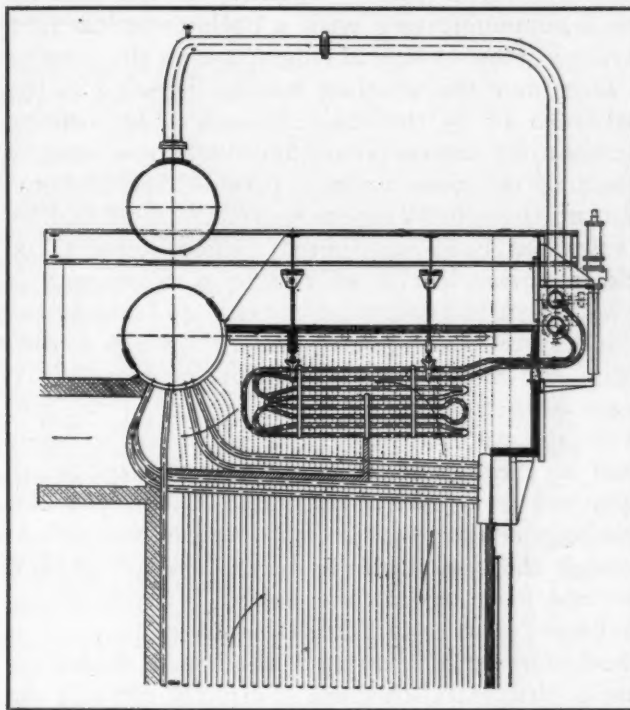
Sectional elevation of upper part of steam generator showing arrangement of superheater
